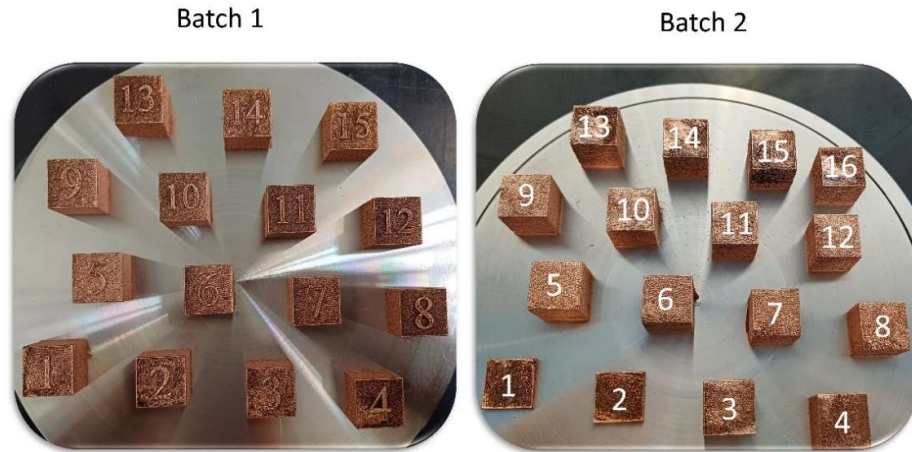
Batch 1 and 2 of CuNi₂SiCr samples produced by low-power green laser machine.
